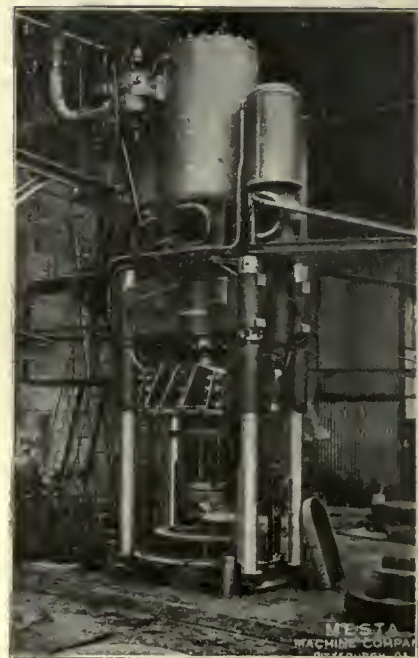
MESTA-HANIEL & LUEG BENDING PRESS FOR BOILER HEADS AND FLANGING WORK.
